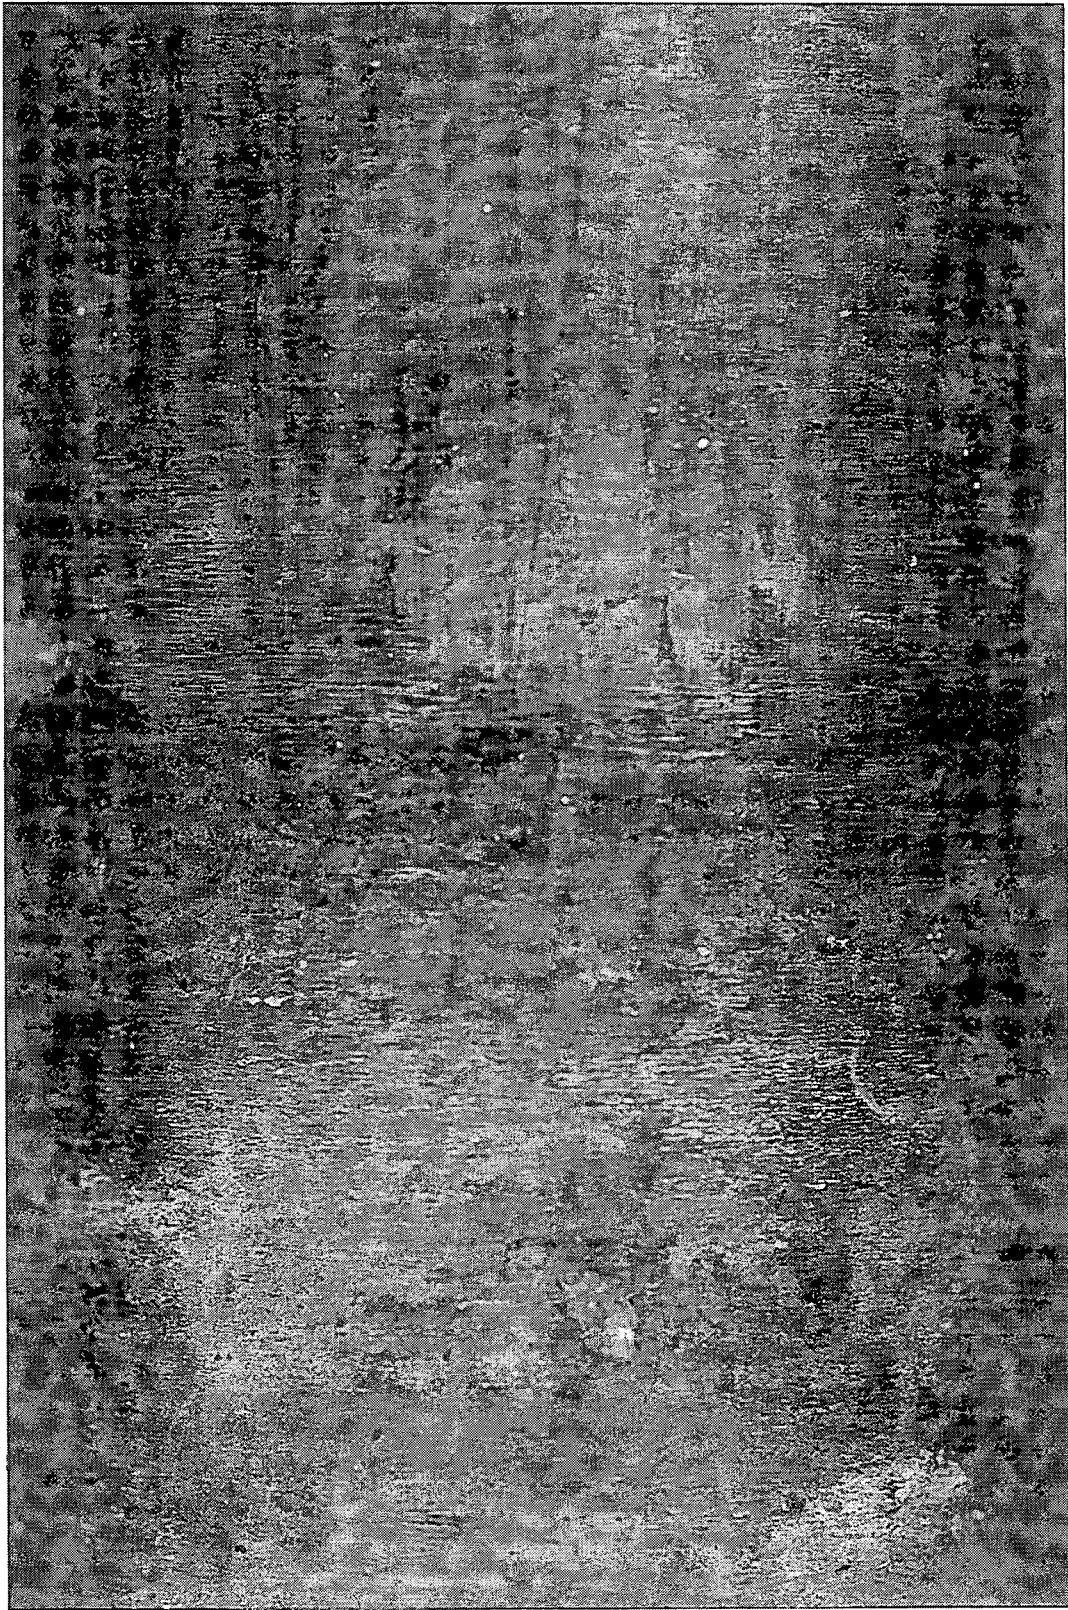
Photograph of the tubesheet top region of Tube R15C28, 270° face. Specimen 2B. Mag. 6.3X.
